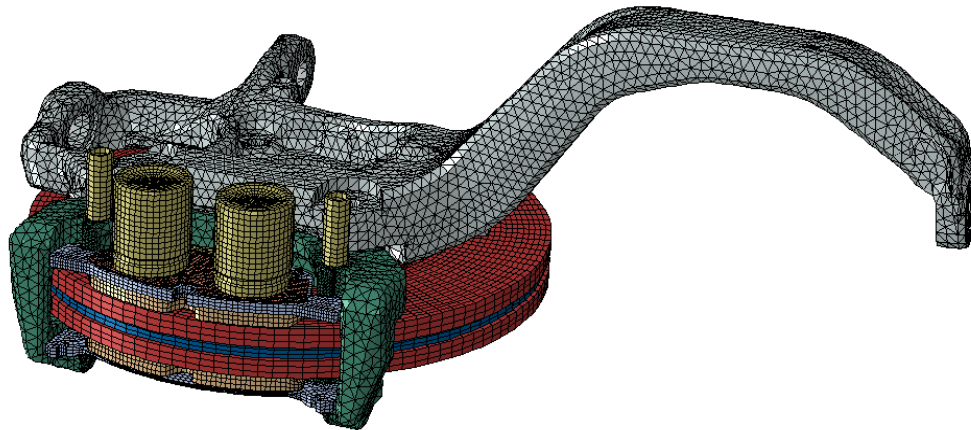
Finite element model of a vented floating caliper disc brake assembly.
